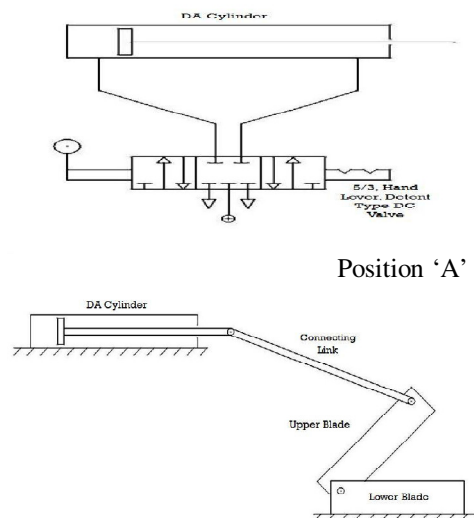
General Layout Of Sheet Metal Cutting Machine.
